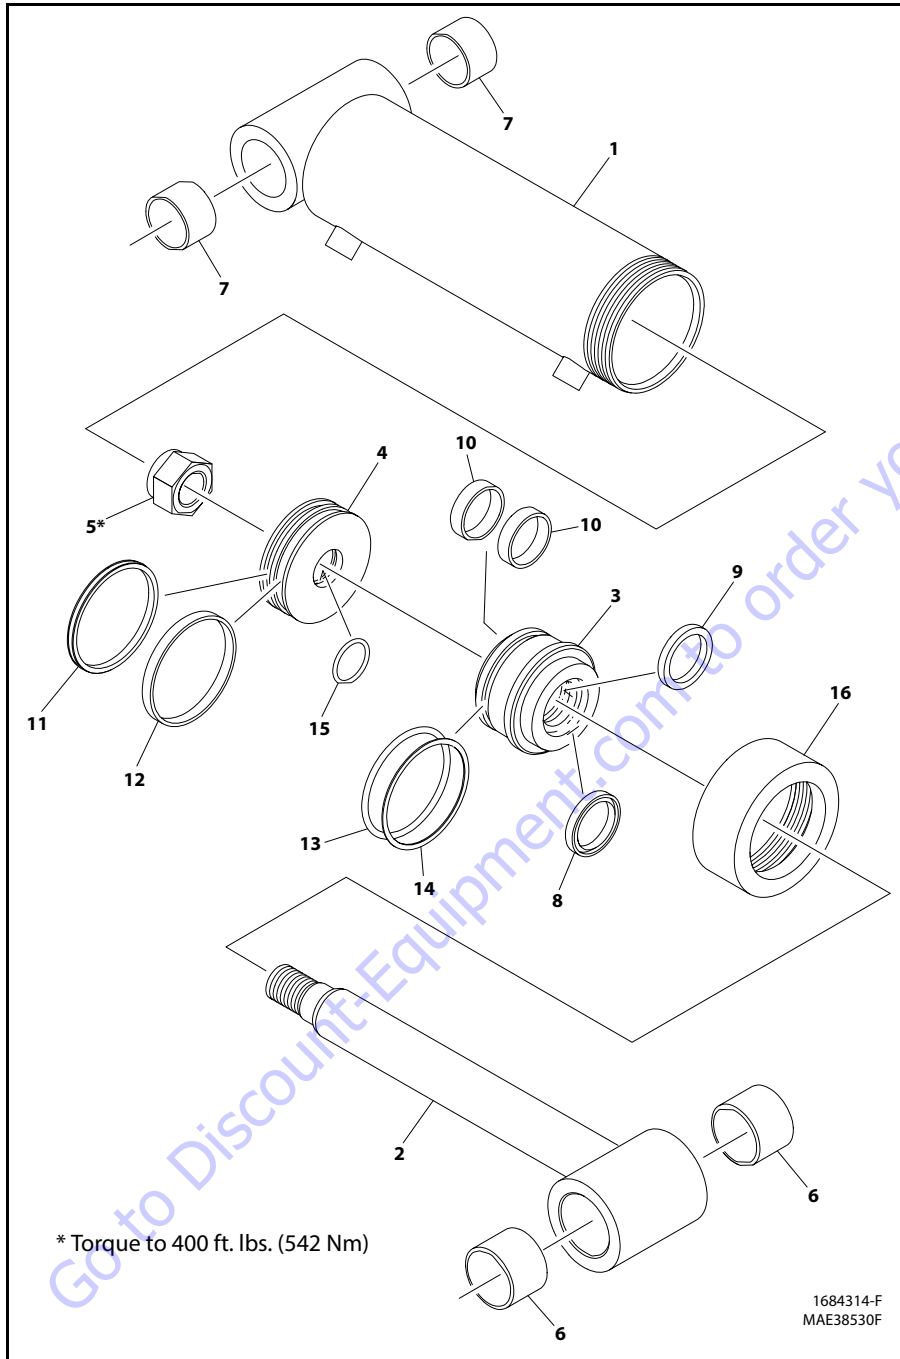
Jib Cylinder (SN 0300239156 to Present)
